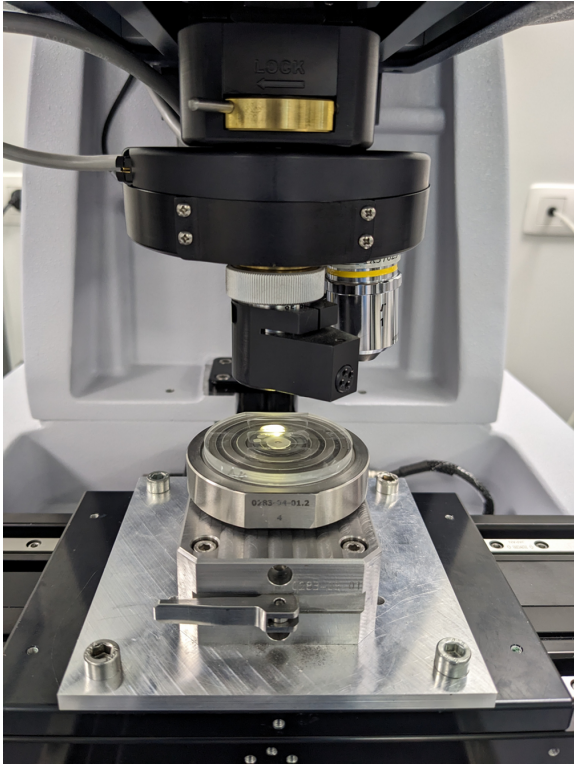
WLI setup with the FFCP bonded to a machining spigot
